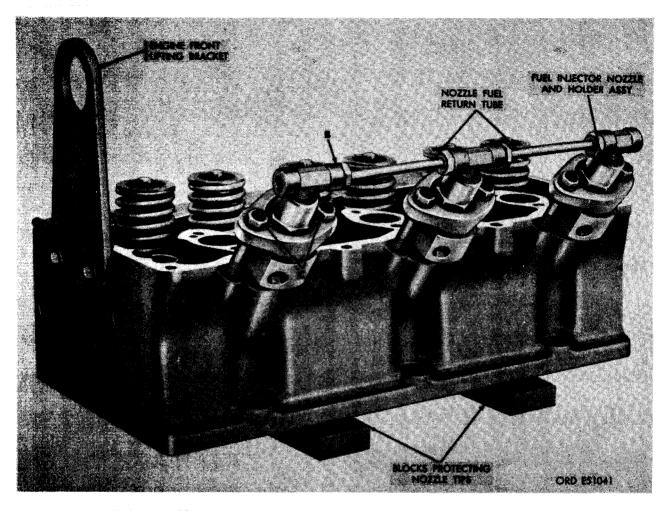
REMOVING OR INSTALLING ENGINE FRONT LIFTING BRACKET AND FUEL RETURN TUBES.
